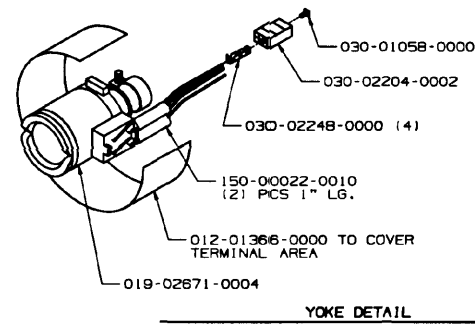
KLN 90B Final Assembly (300-05194-0001 R-AL, Sheet 2 of 2)
